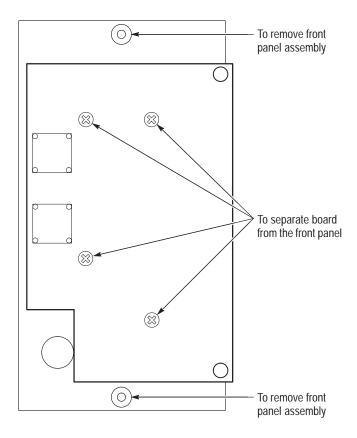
Screws that hold the front panel circuit board (A2) in place
